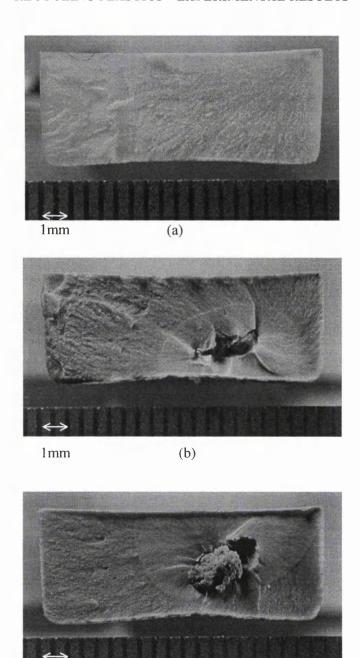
Tensile and impact fracture surface images of (a) typical impact fracture of VH (b) tensile RH showing impurity within the sample (c) RHE tensile fracture surface showing impurity inside the sample
